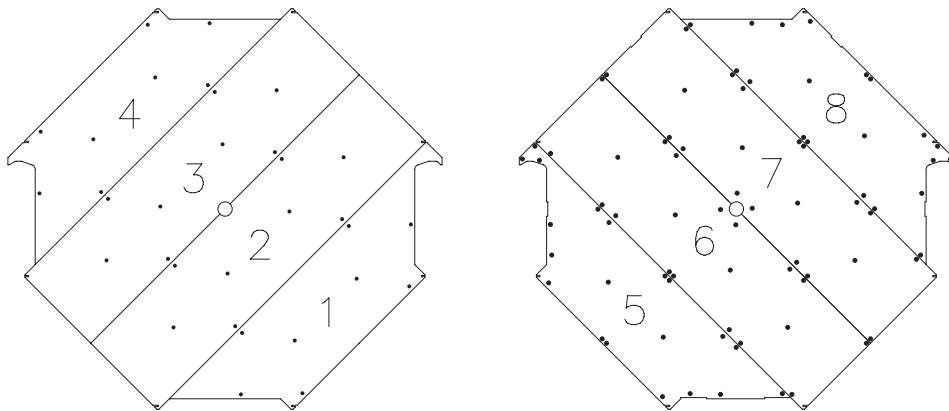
Arrangement of steel plates in the two layers of a far detector plane, showing the plate numbering scheme. A drawing of the bottom (downstream) layer is on the left and the top (upstream) layer is on the right, both seen looking toward Fermilab. “Top” and “Bottom” refer to how they were stacked when being assembled. The dots indicate holes for the plug welds or handling fixtures. Numbering is along the U (left) and V (right) axes. The installed planes are supported by the “ears” on plates 1, 4, 5 and 8.
